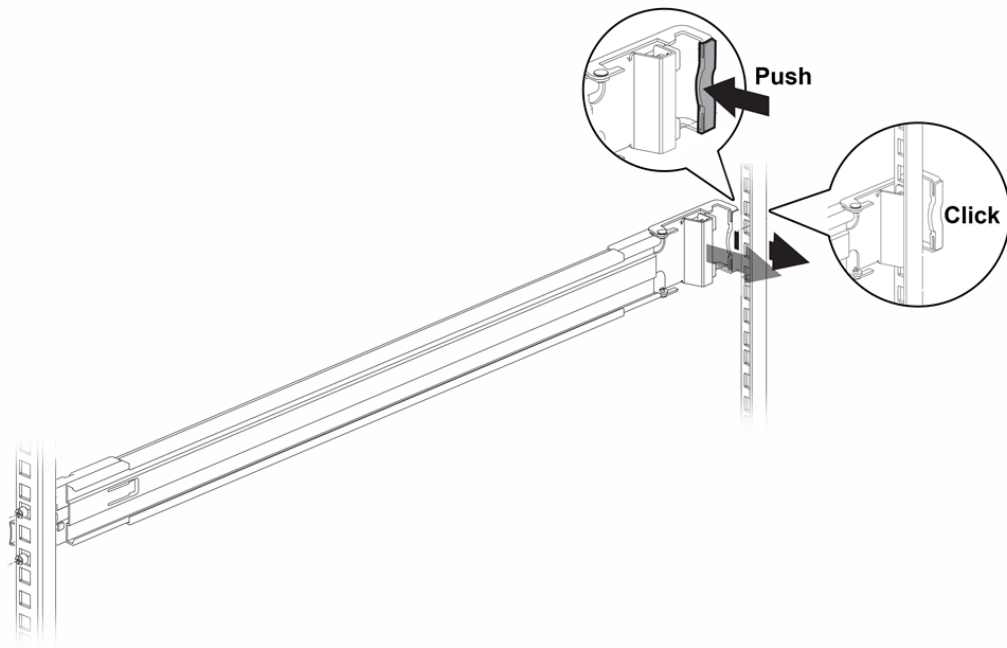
Attaching the Slider Assembly to the Rear Rack Post
